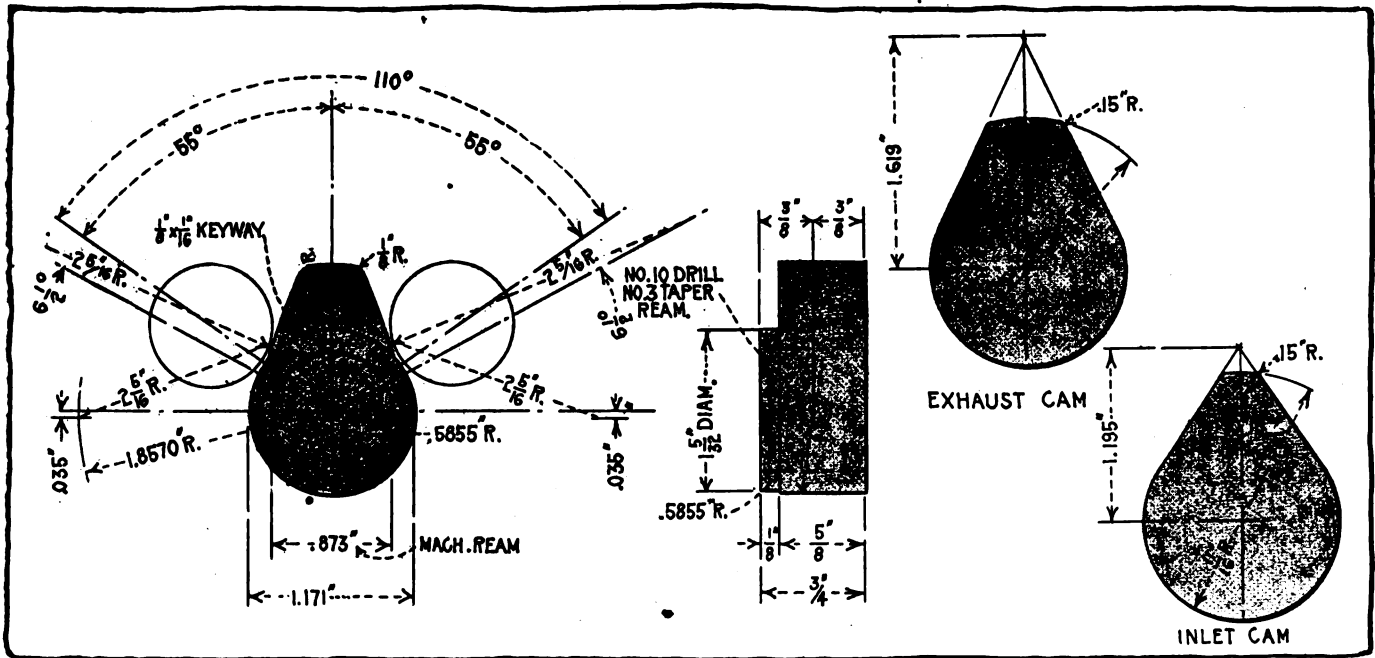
Left, full working drawing of a straight-sided cam. Right, illustrating difference in intake and exhaust cams
